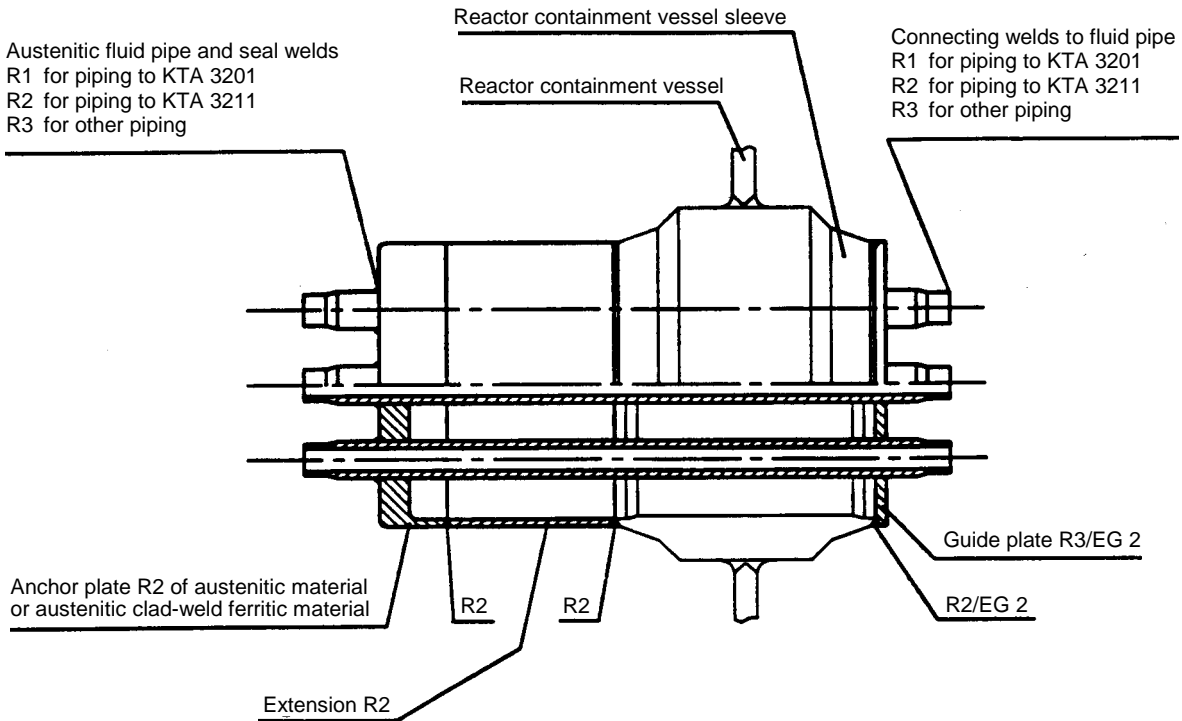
Examples of pipe penetration of design type I with fluid pipe and identification of design loading levels R1, R2 and R3
